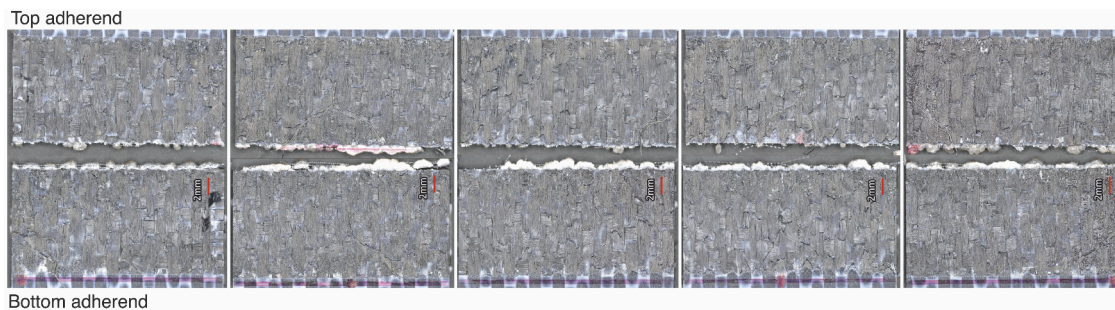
Fracture surfaces of continuous ultrasonic weld made using rounded sonotrode. Welded in the direction left to right.
